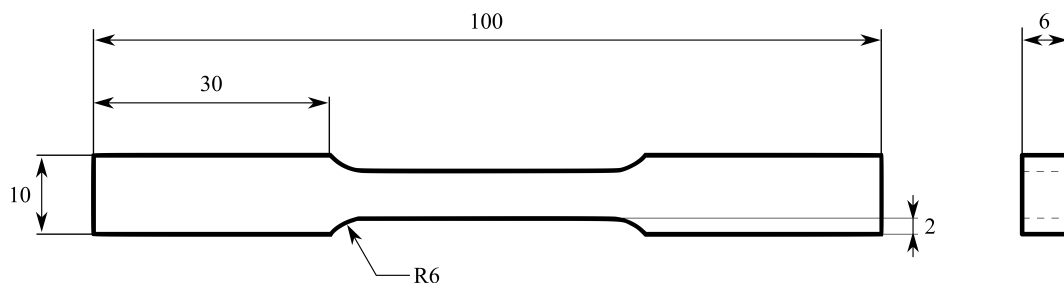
Dimensions of sheet-type tensile specimens ASTM E8. Adapted from [203].
